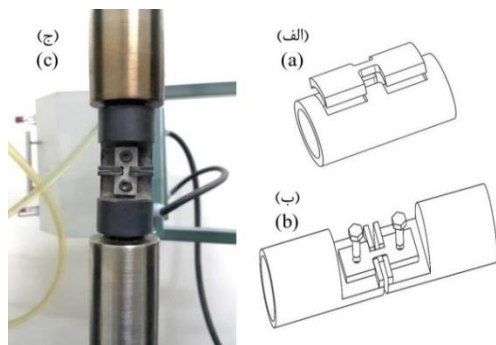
Pictures of (a) extracted standard tensile testing specimen [20], (b) used tensile specimens gripper [20] and (c) standard tensile testing specimen and used gripper during tensile testing
